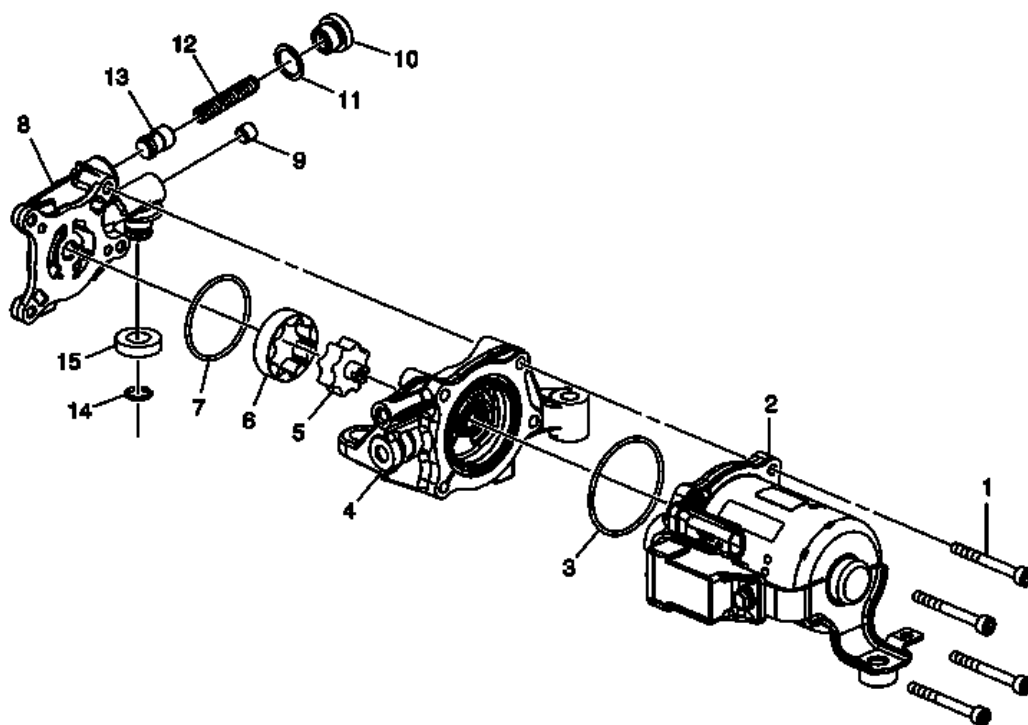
Auxiliary Fluid Pump Cleaning and Inspection (Hybrid)
